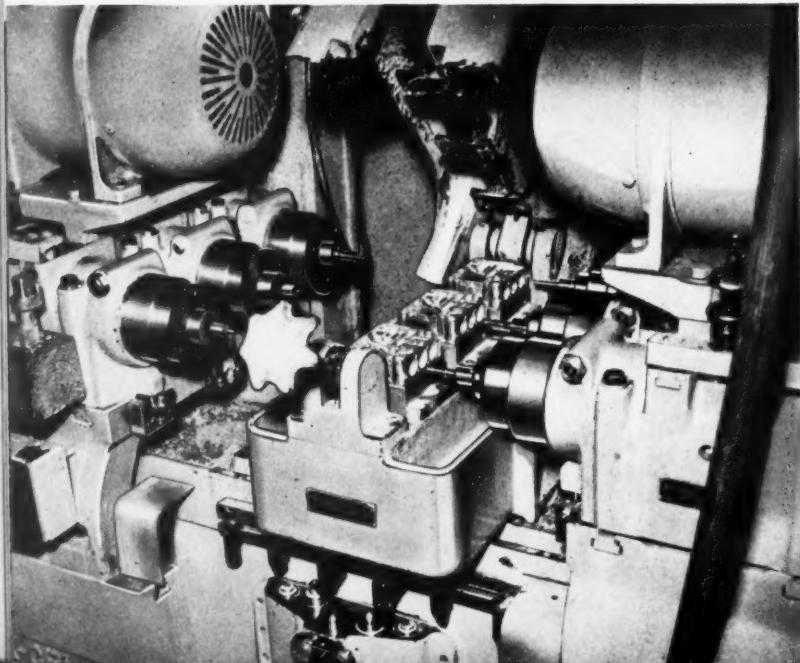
(Below) Precision Boring Machine with Three Fixture Stations, for Finishing Thirty Bores in Each Shifter-valve Body
